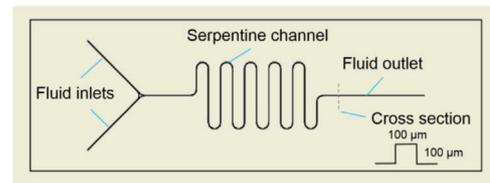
Designed feature of a mold insert for fabricating microfluidic chips. (The size of the mold insert is 75 mm×25 mm. The microstructure size is 100 μm×100 μm.).
